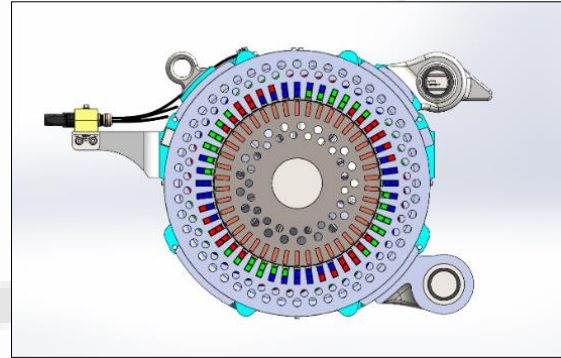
Electrical motor cross-section perpendicular to the shaft axis
